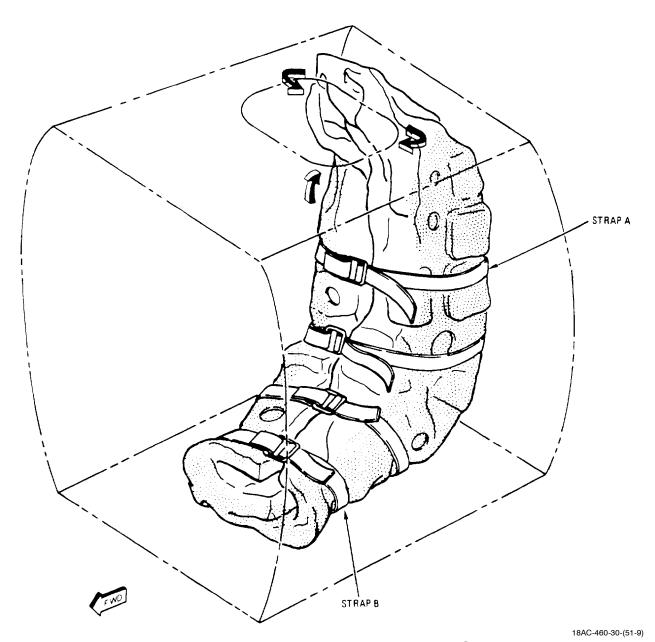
Removal - No. 2 Fuel Tank Folding (Sheet 9)
